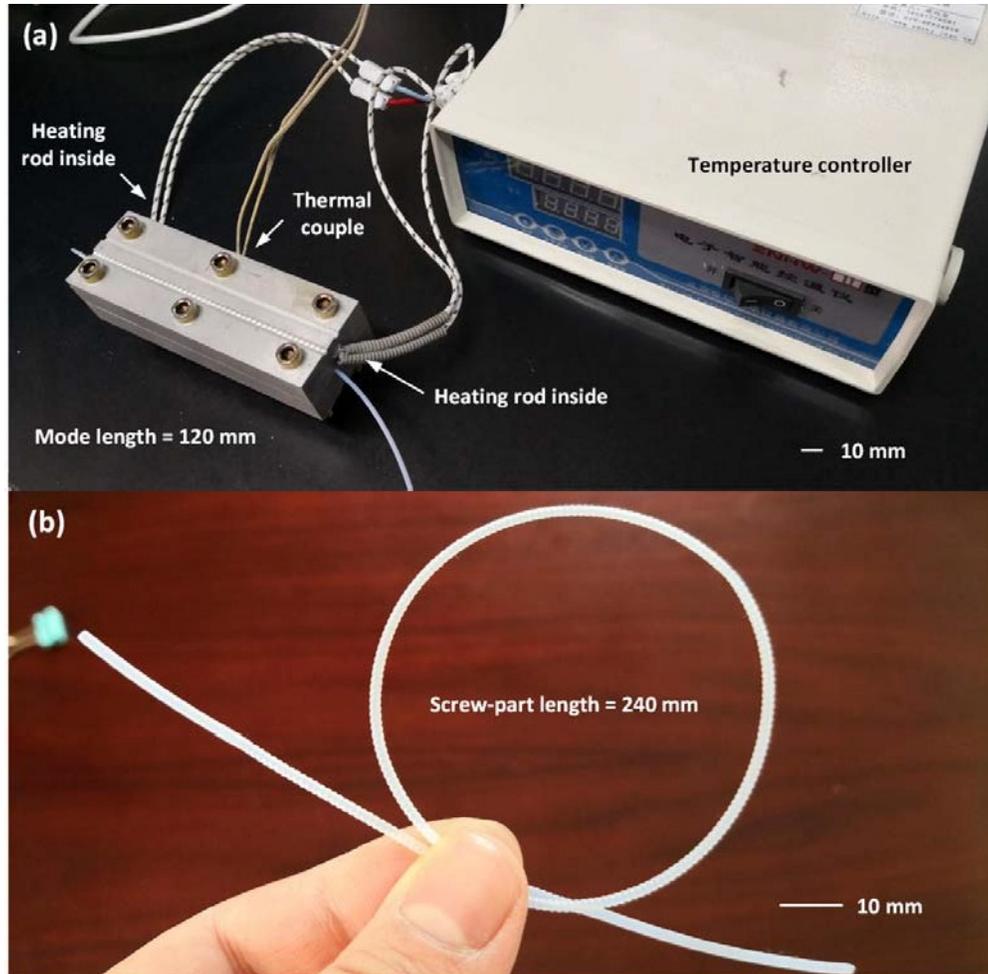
Pictures for the improved heating system and longer fabricated tubes.
